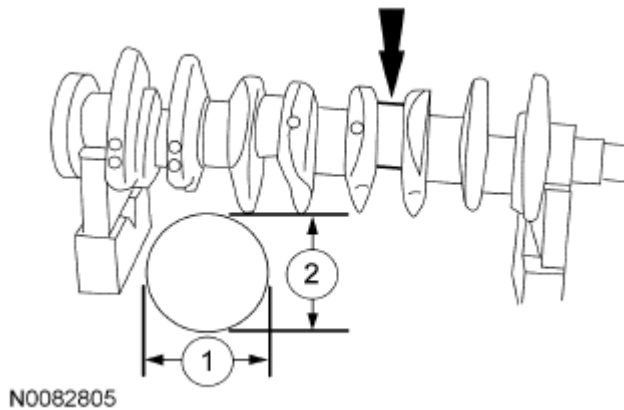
Measuring Crankshaft Connecting Rod Bearing Journal Diameters In At Least Two Directions
